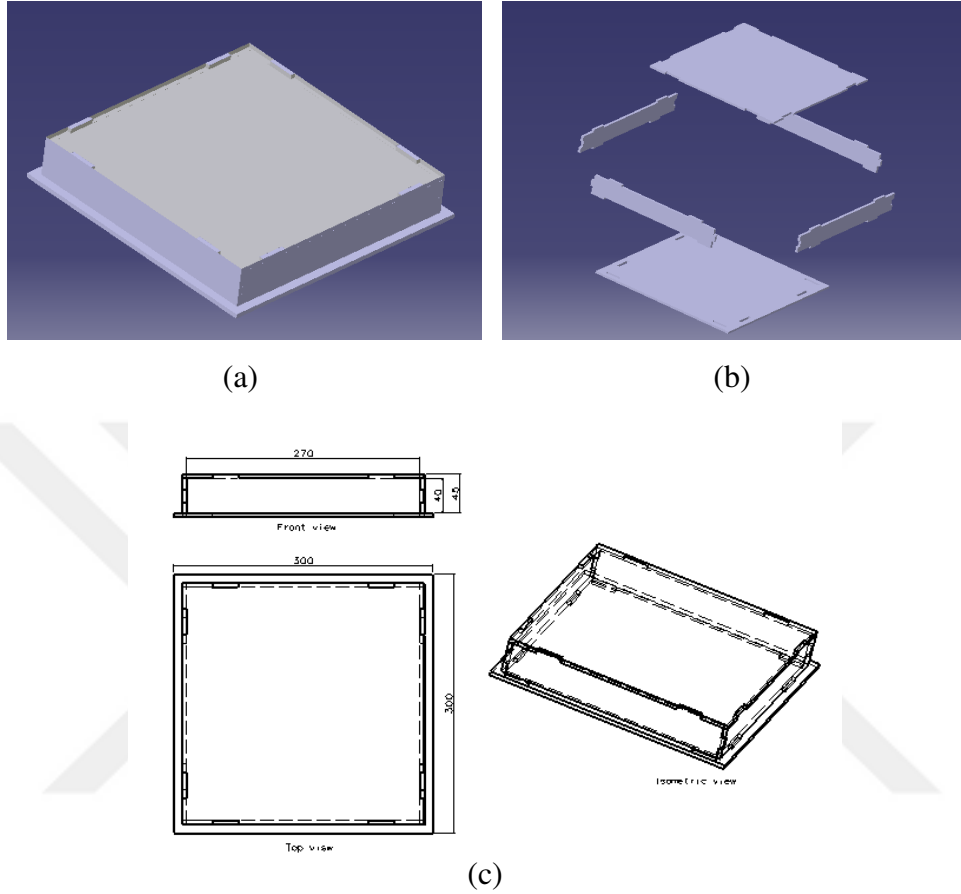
Mold for specimen fabrication (second stage), (a) 3D model, (b) exploded view, (c) technical drawing- dimensions in mm
